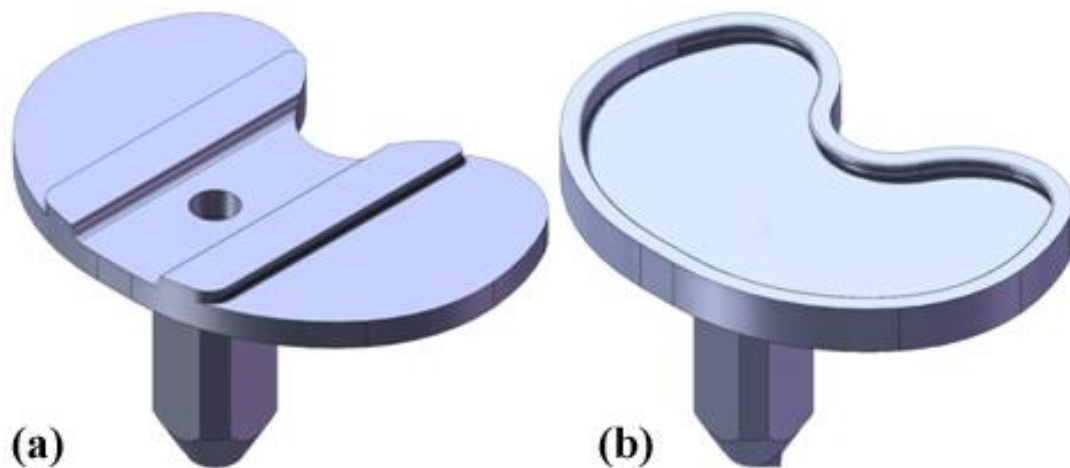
Locking Mechanisms Comparison: (a) AMK Dovetail Design; (b) PFC-type Peripheral Locking Mechanism Design;
